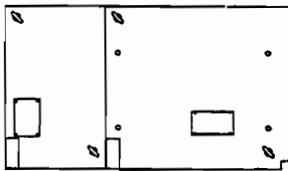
(d) External view of controller (S-700, large size cabinet with side cabinet, circuit breaker handle)
